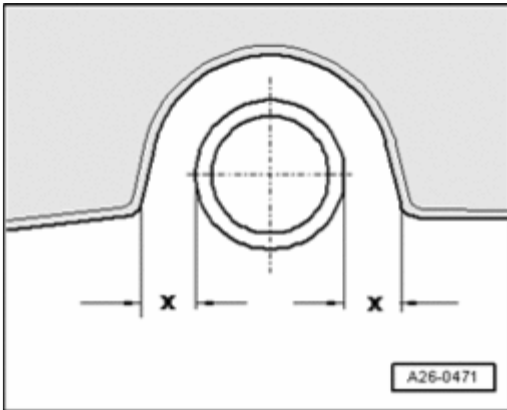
Checking Distance Of End Pipes At Left/Right To Bumper
